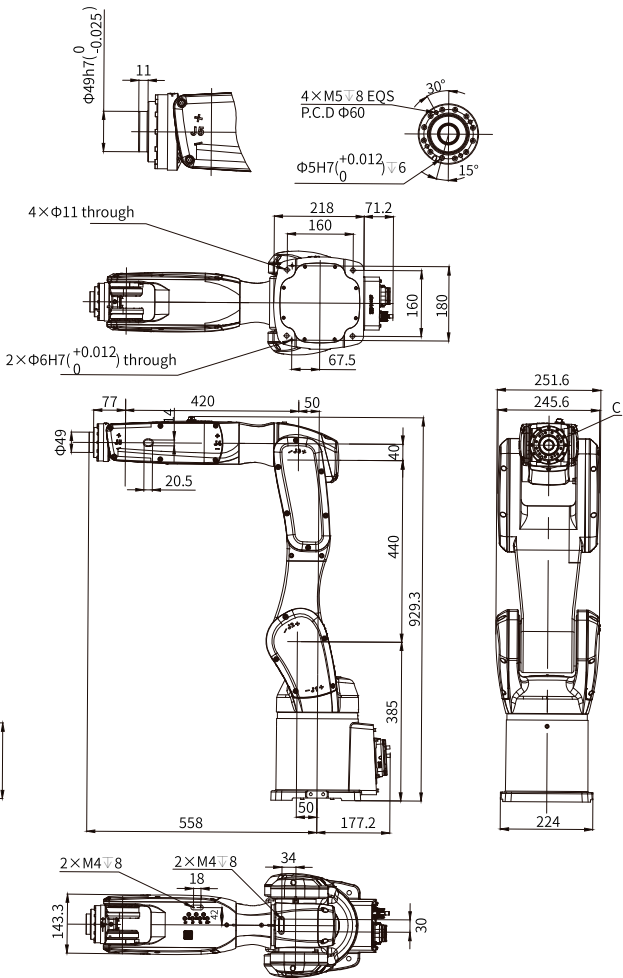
Outline dimensions for IRS311-7-90TS-INT (unit: mm)
